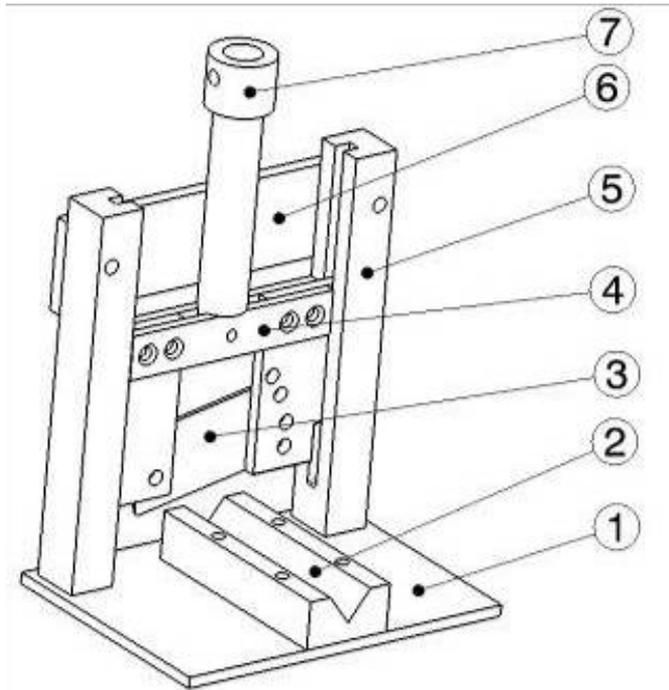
Cutting device (1 – motherboard, 2 – “V” support, 3 – cutting blade, 4 – beam, 5 – guiding columns, 6 – fixing bar, 7 – coupling bar)
